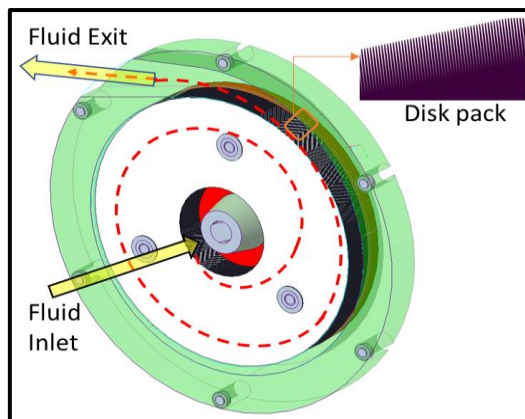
Reversible Tesla machine (compressor mode): principle of operation.
